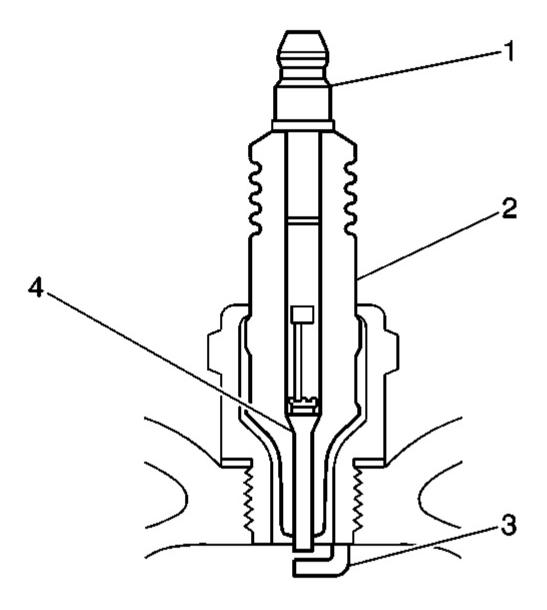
Inspecting Spark Plug Components Courtesy of GENERAL MOTORS CORP.
